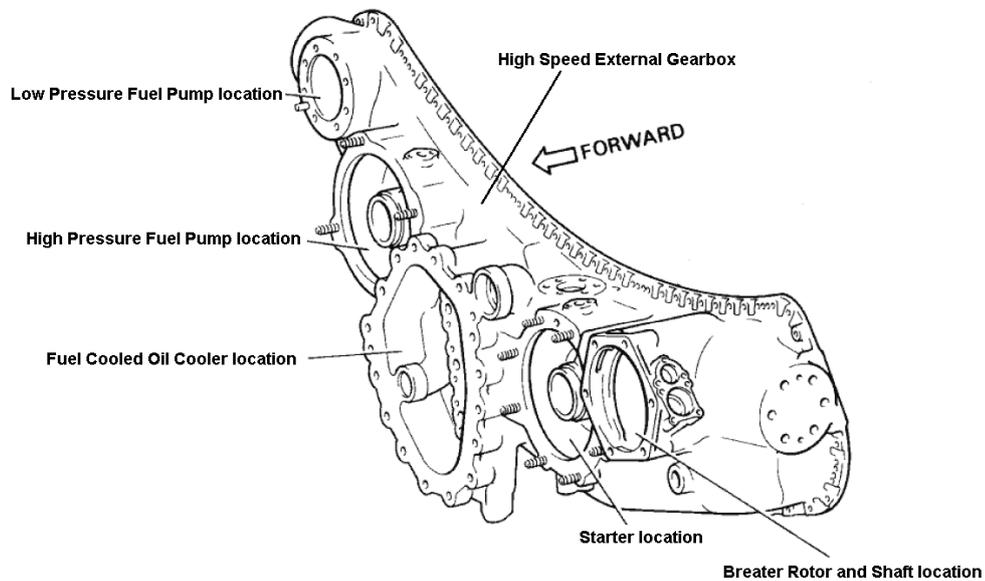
The high speed external gearbox and the locations and its subcomponents
